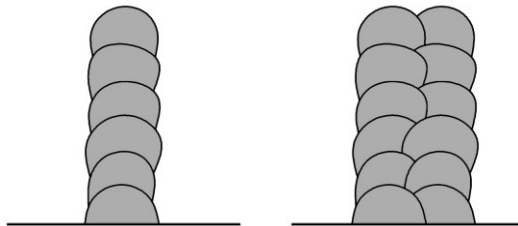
A schematic cross section of a single bead wall or “thin wall” (left) and a multiple bead wall (right)
